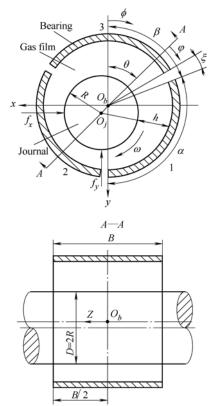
Calculation coordinates for a three axial grooves gas-lubricated journal bearing
